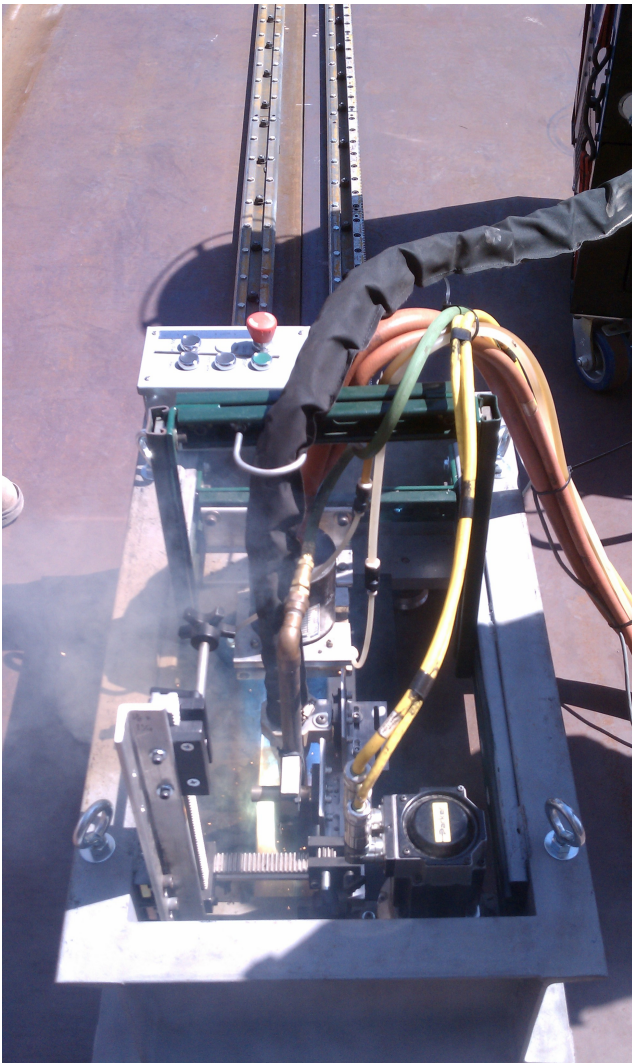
HiDep Welding process portable robot in production of wind energy towers.
